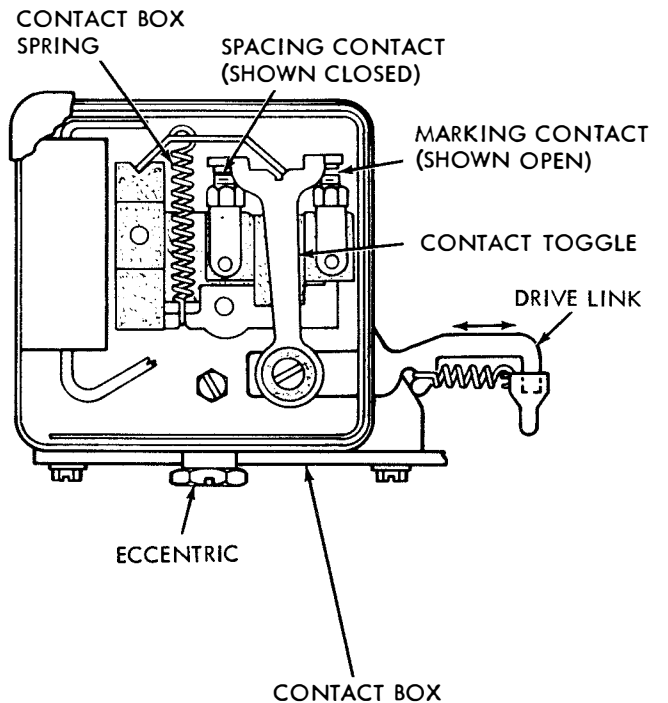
Contact Box Mechanism (TT-253/UG
